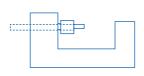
and hollow-center clamping (when using a cylinder with through hole) for processing bar material
